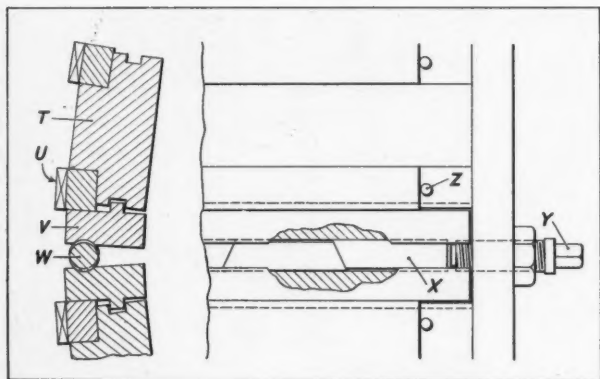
Diagrammatic view of the clamping arrangements for rack blanks on the drum of the Romi generating machine
